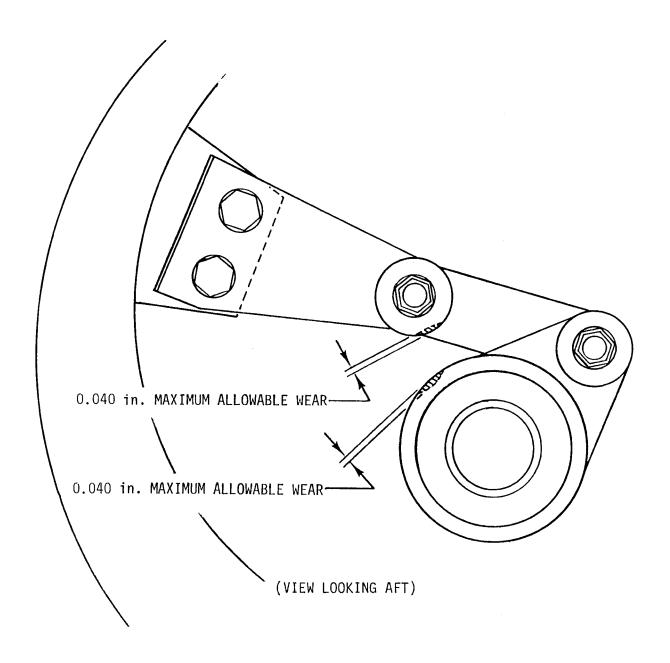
DAMPER BEARING HOUSING WEAR LIMITS
